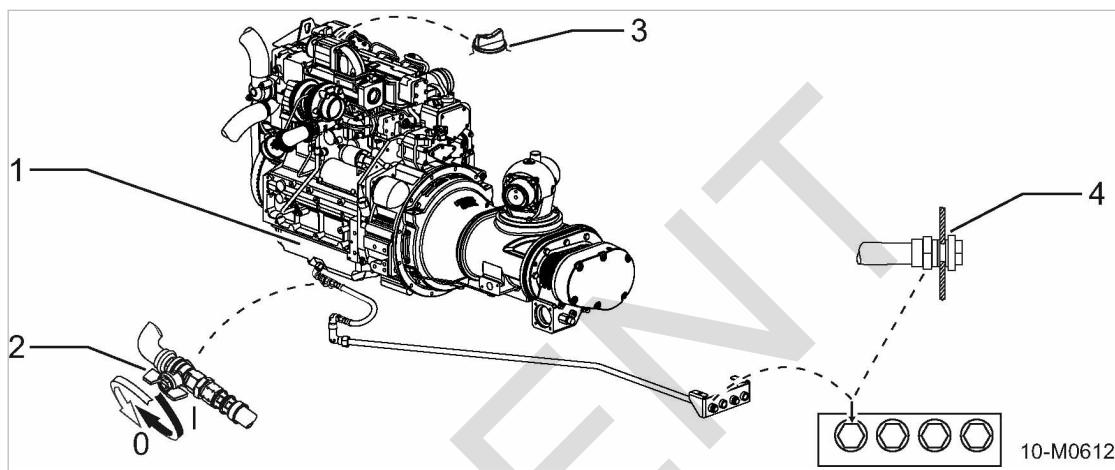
Draining the engine oil (closed floor pan - stationary machine):
